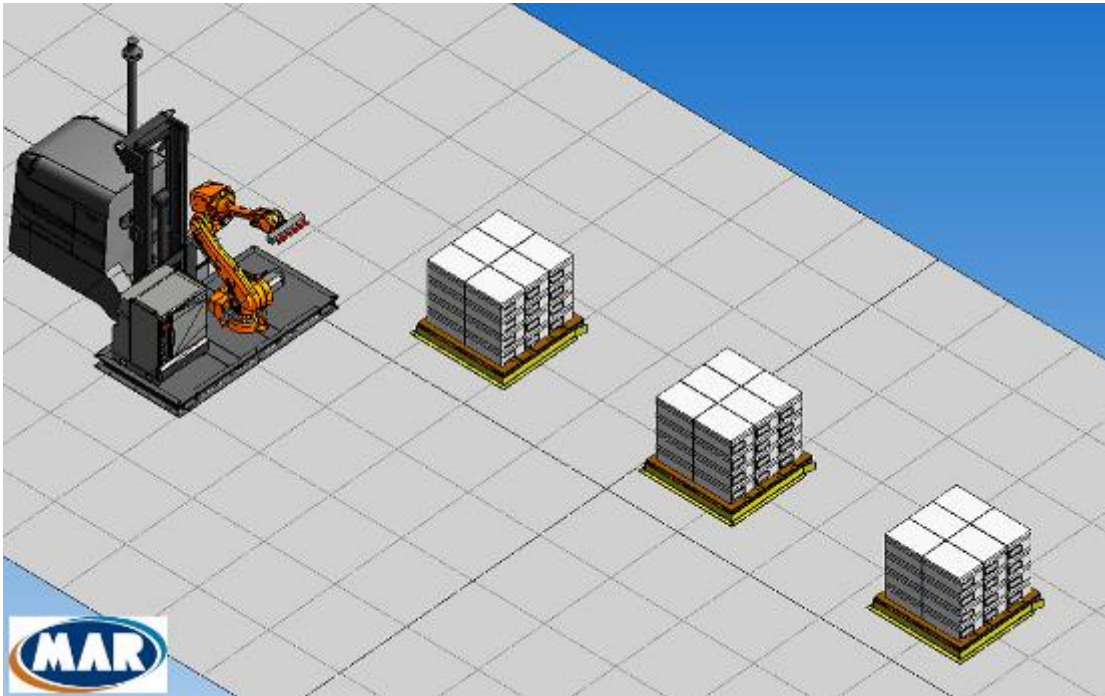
Plan view of palletising, de-palletising, container loading setup
